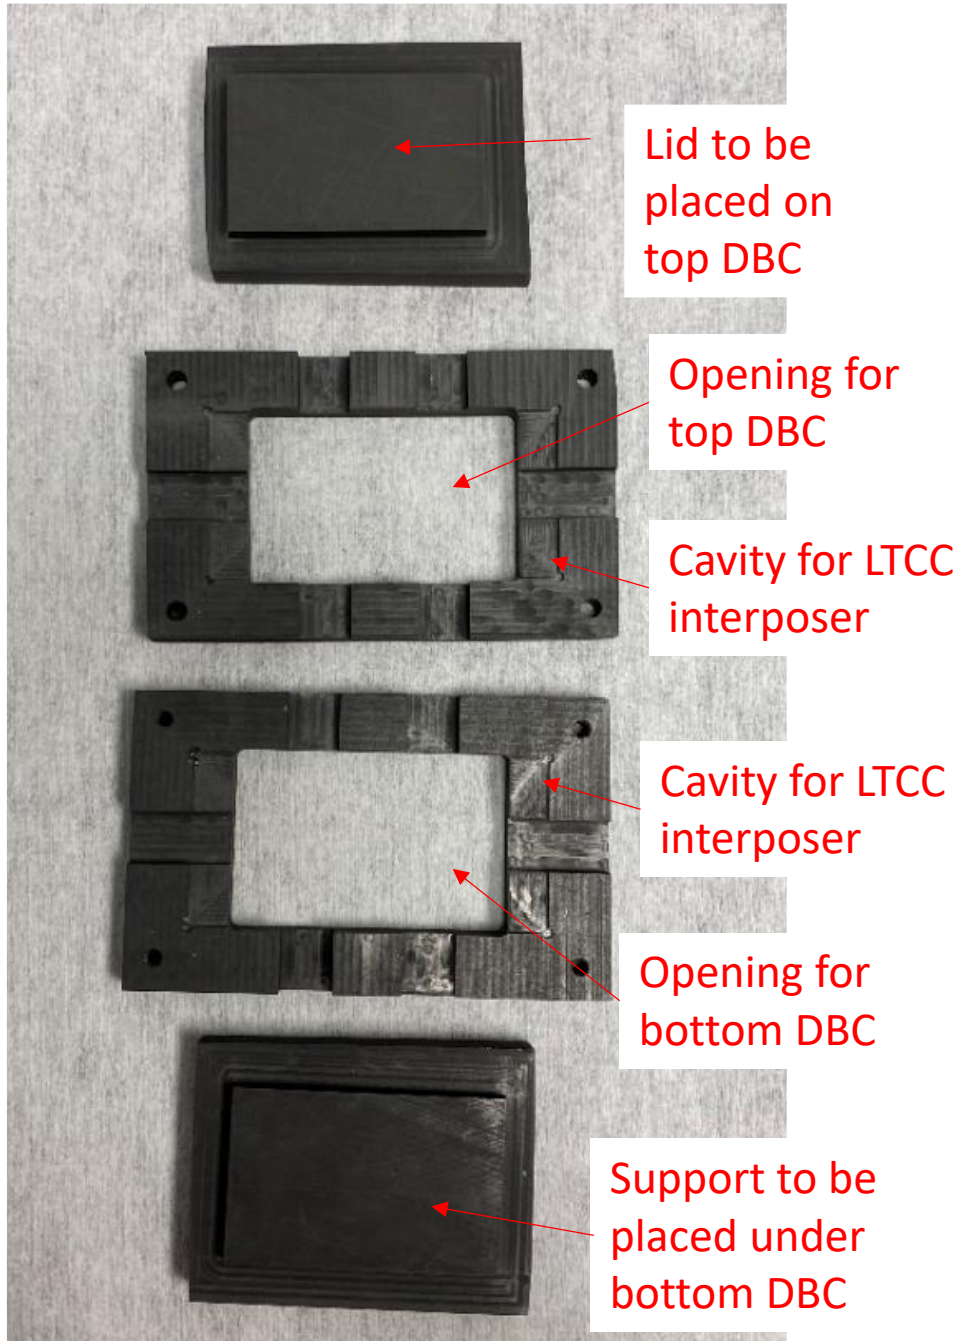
20 Graphite fixture set for module assembly in reflow oven.
